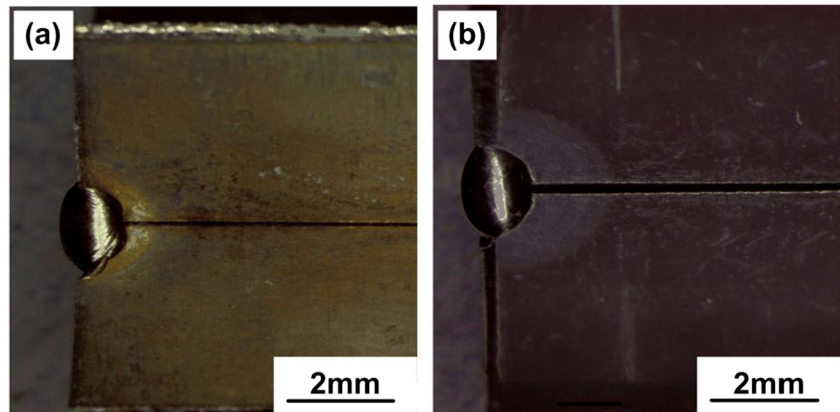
Optical macrographs of weld bead. a As-welded and b corroded
